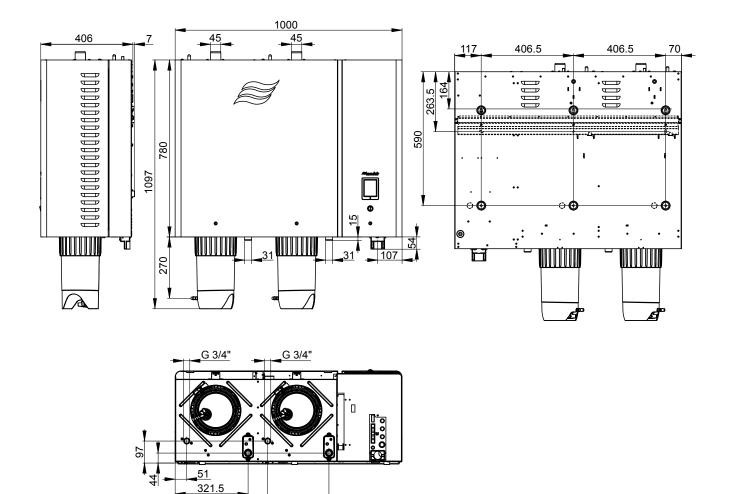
Unit dimensions unit "L" (dimensions in mm)
